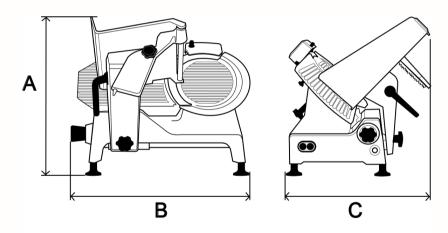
EQUIPMENT GENERAL DIMENSIONS
